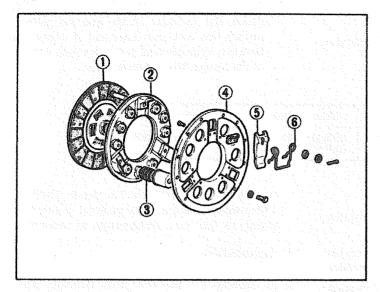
Pressure Plate Assembly (Canter 3-ton Truck)
